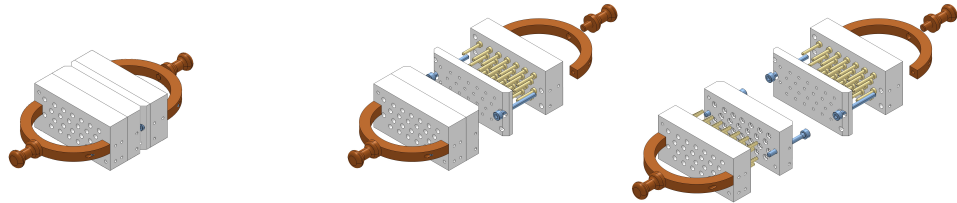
Technical drawing of the high voltage connector. It consists of PTFE, copper and stainless steel screws. The pins inside the connector are made of a copper alloy plated with gold.
